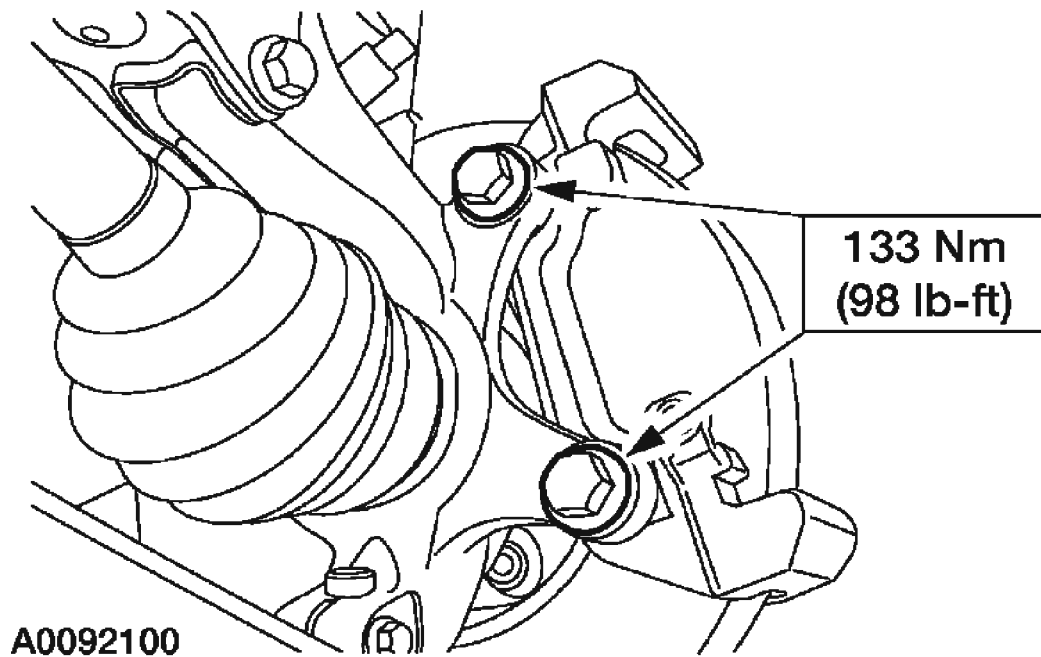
Removing Bolts And Brake Caliper Anchor Plate
